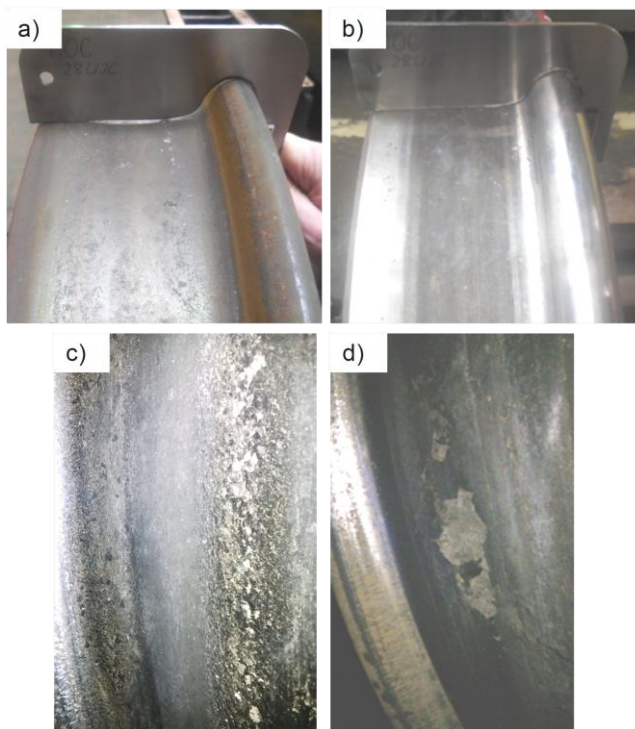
View of the rolling surface of the vehicle wheels EN76 026: a) with visible wear in the contact area, b) view of the surface after rolling, c) flaking, d) chipping [A.M. Rilo Cañas]
